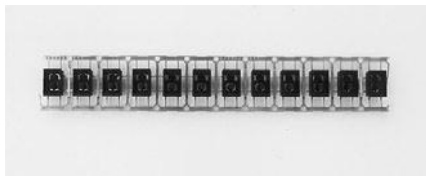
Molded parts with punching lattice (see from stationary mold half)
